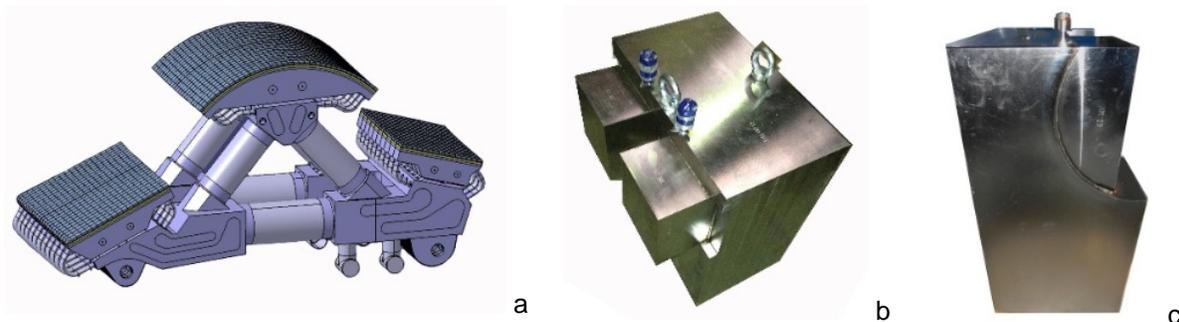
Drawing of the diverter attachment fitting (a) and photographs of the bimetallic steel XM19-to- steel 316L HIP DW assemblies (b, c).
